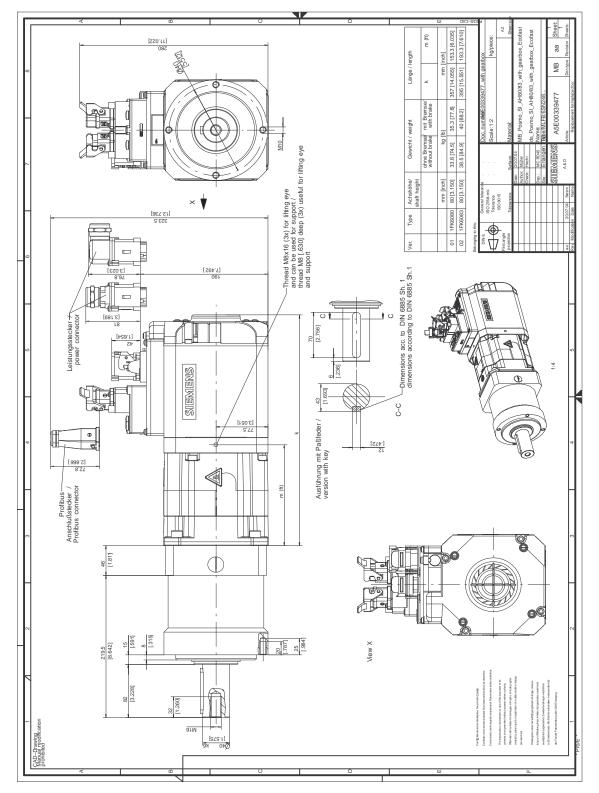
Dimension drawing POSMO SI 6SN248 –2CF 0–1G vith gearbox LP155–M01
